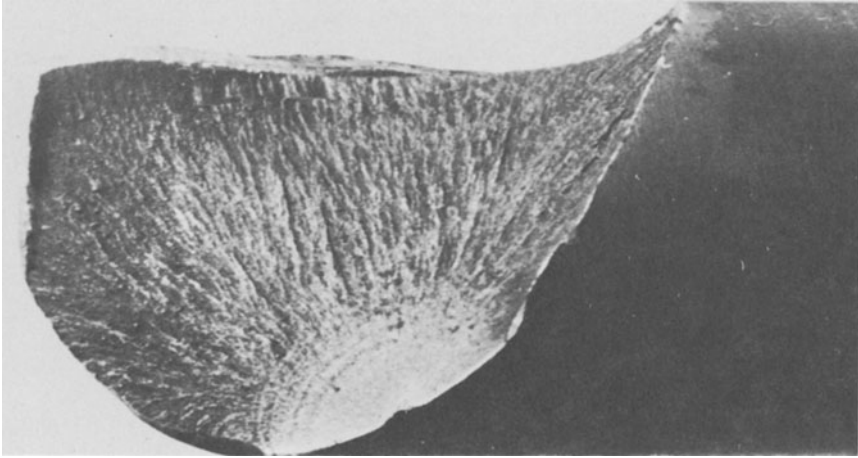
Classical torsional fatigue failure in a case-hardened steel.
